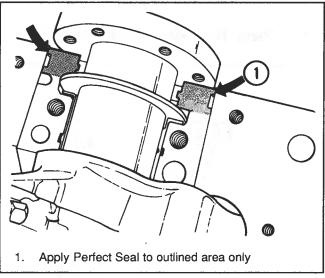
Applying Sealer To Block At Rear Main Seal
